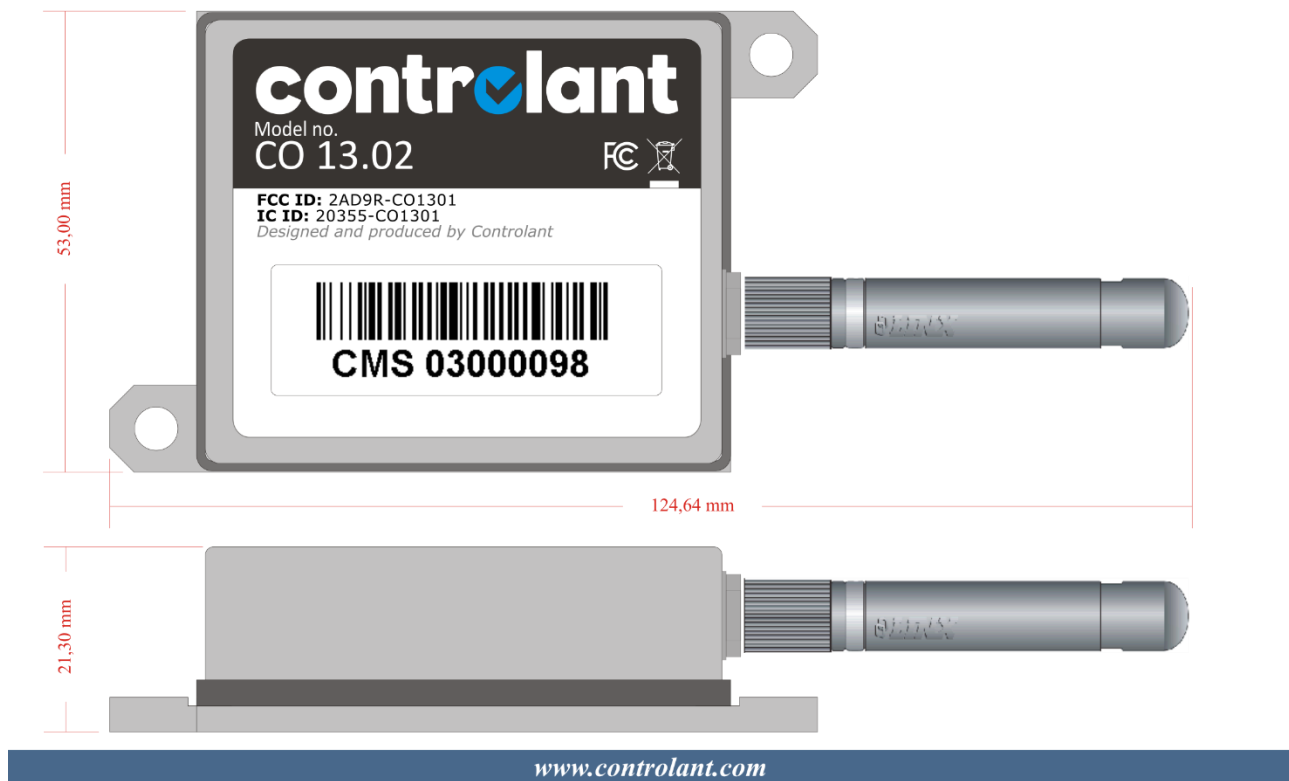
Mechanical drawing of the CO 13.02 wireless logger
